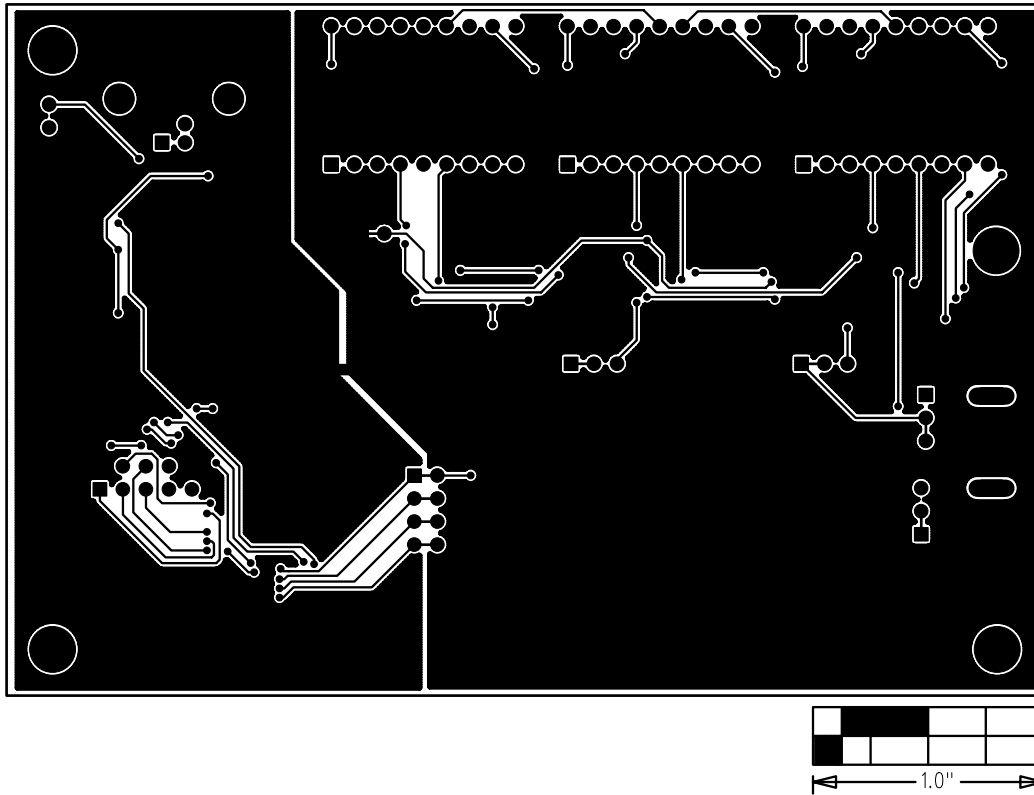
MAX6969 EV Kit PCB Layout—Solder Side
